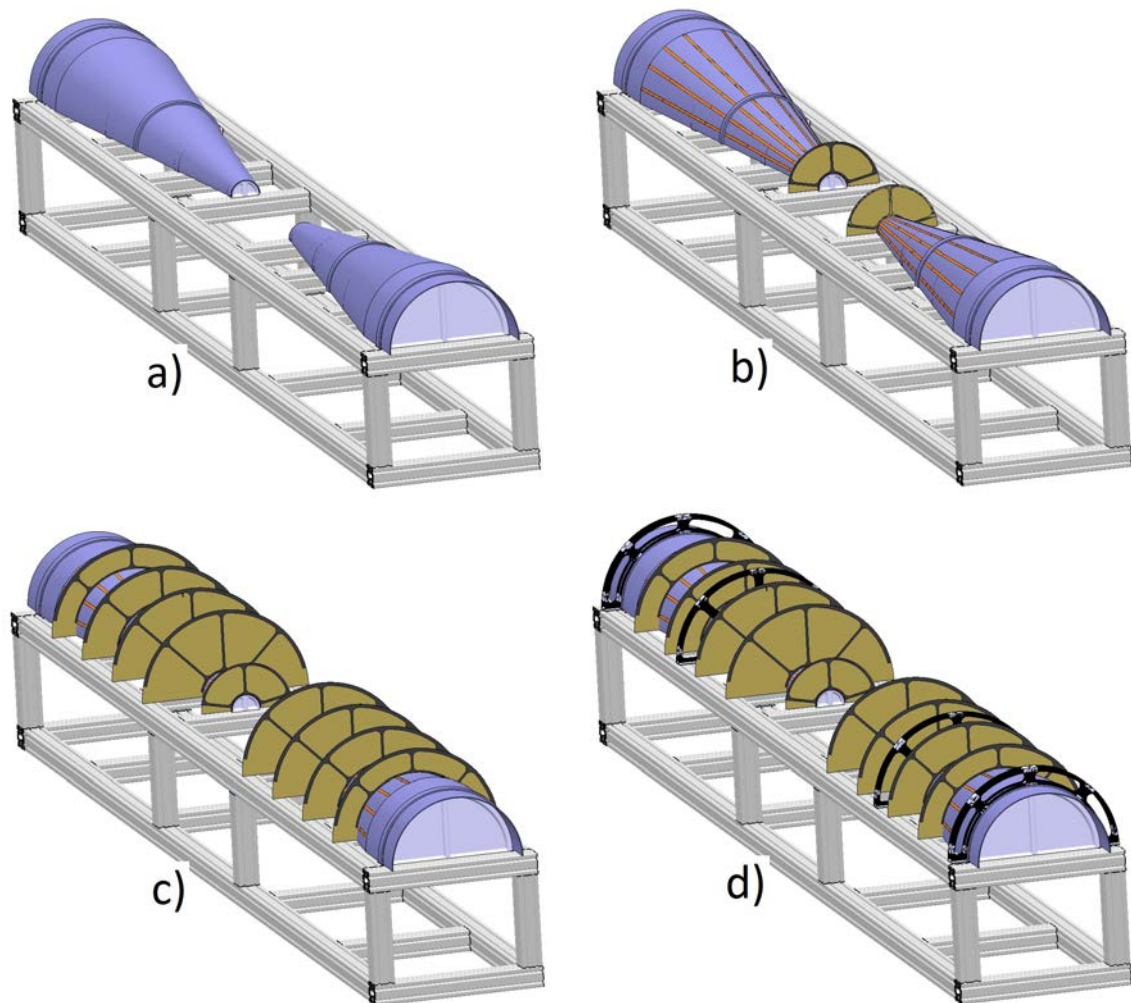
Sub-assembly of the FTDs and stainless steel Conical Shields: a) two half Conical Shields on a dedicated temporary support; b) assembly starts with the placement of the innermost FTD disks and their cables; c) the disks and their services are placed sequentially from the innermost to the outermost; d) once all the disks are in place, the support collars are attached to the Conical Shields.
